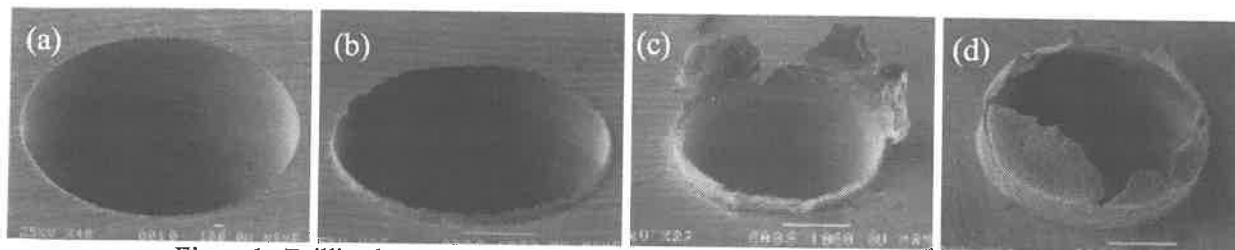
Drilling burr types; (a) (b) uniform burr, (c) transient burr, (d) crown burr
